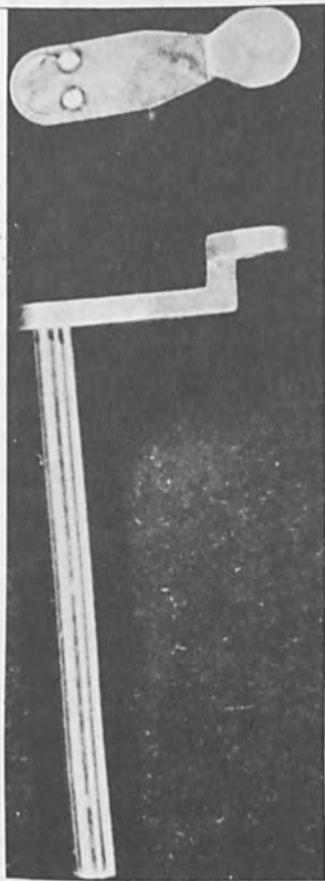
Wiper blade is attached to a shaft utilizing spot welding in place of staking.
